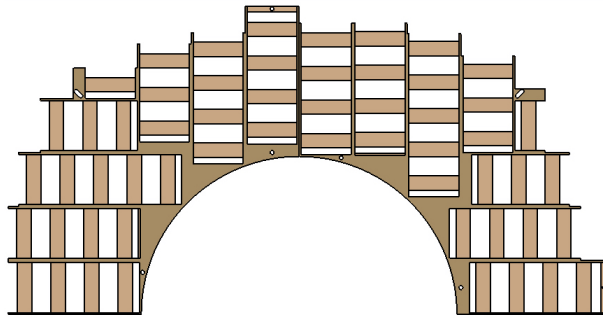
Drawing of inner support unit with holes for fixation on the cooling plate
